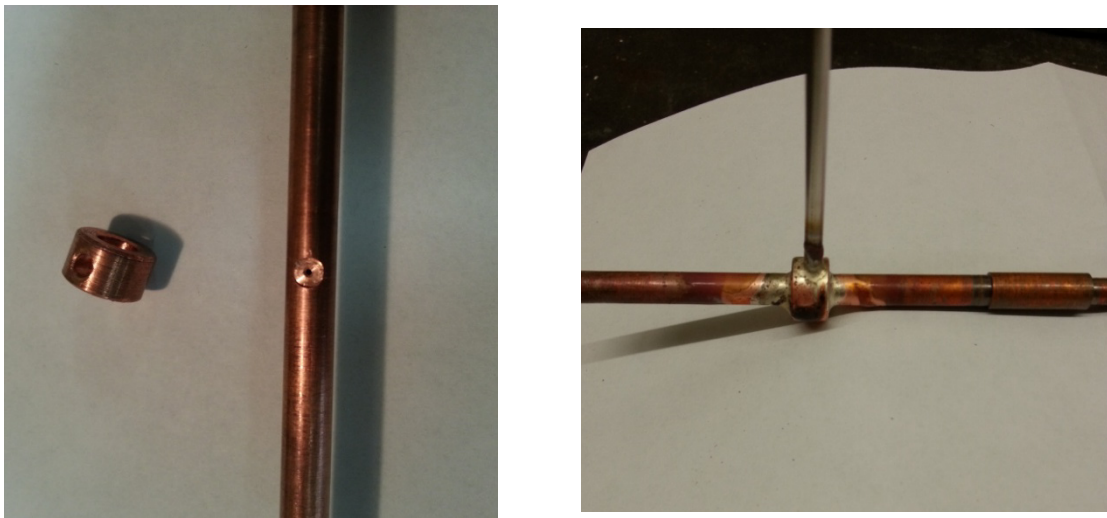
Left: copper tube with the hole and the copper bush for the soldering. Right: pressure port soldered on the heat exchanger
